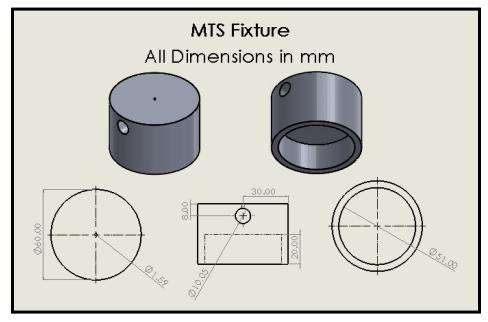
Isometric View and Dimensioned Sketch of the Testing Fixture.
